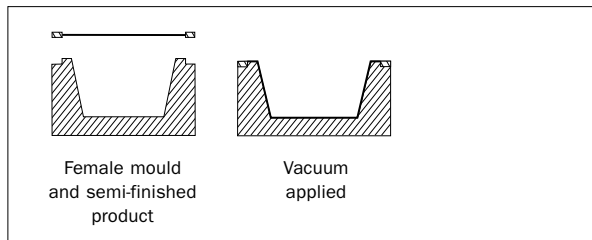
Diagram of female forming without any mechanical or pneumatic pre-stretching.
